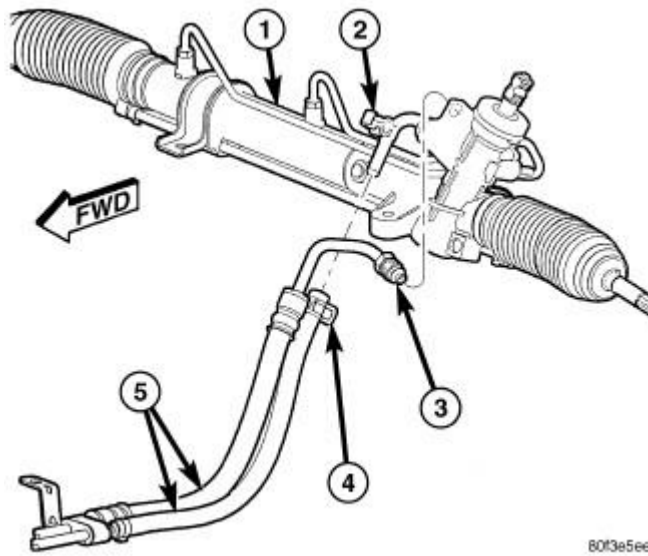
Hoses At Power Steering Gear - 2.4L Turbo
